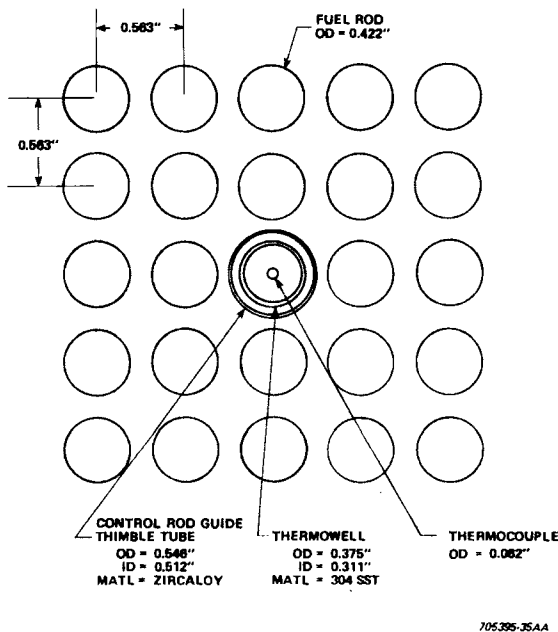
Partial Fuel Assembly Cross-Section Showing Thermocouple, Thermowell, Control Rod Guide Thimble Tube and Fuel Rod Configuration for Fuel Assembly Internal Temperature Measurement Test
